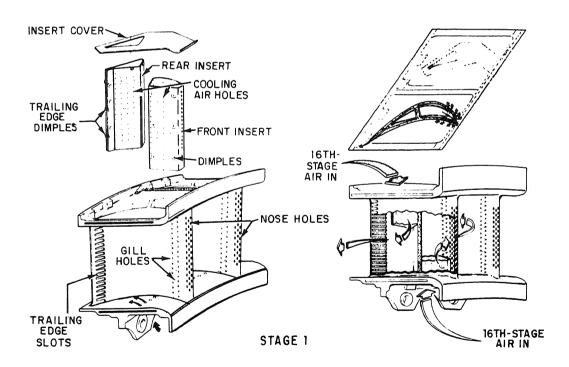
First-stage gas generator turbine nozzle cooling.
